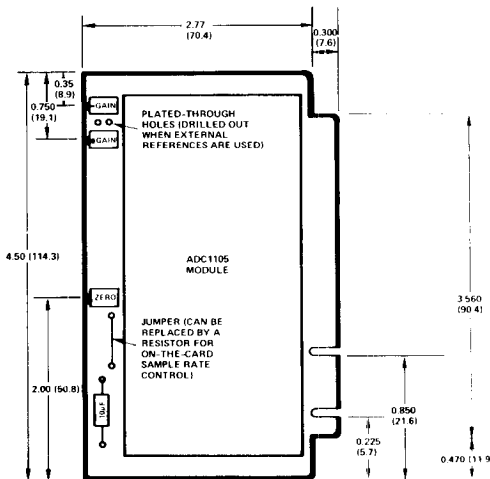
AC1547 Mounting Board Outline Dimensions Dimensions Shown in Inches and (mm)
